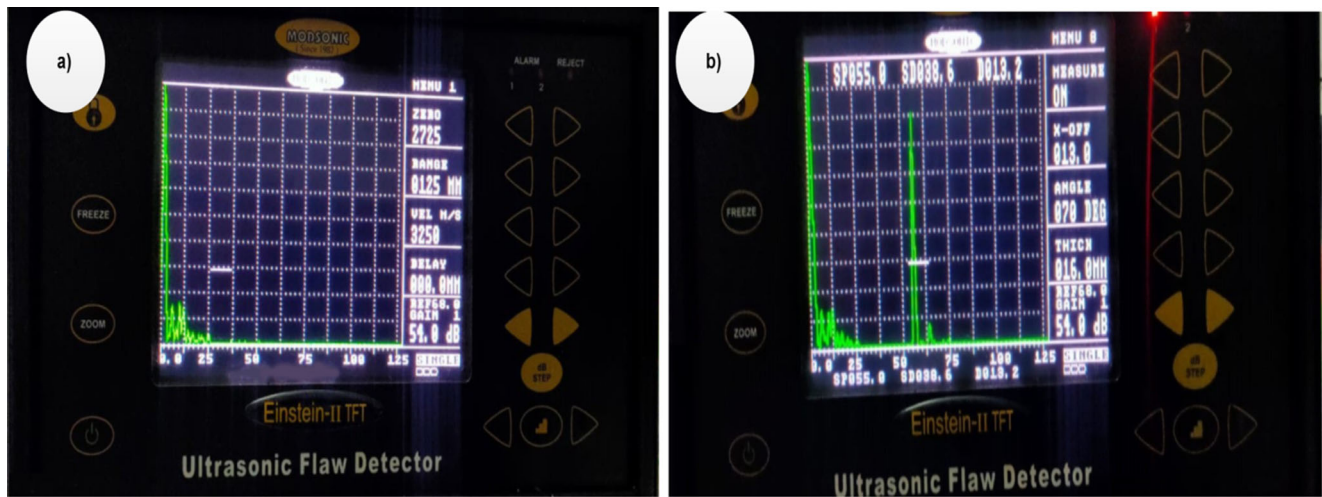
Ultrasonic testing showing (a) sound weldment (b) unsound weldment
